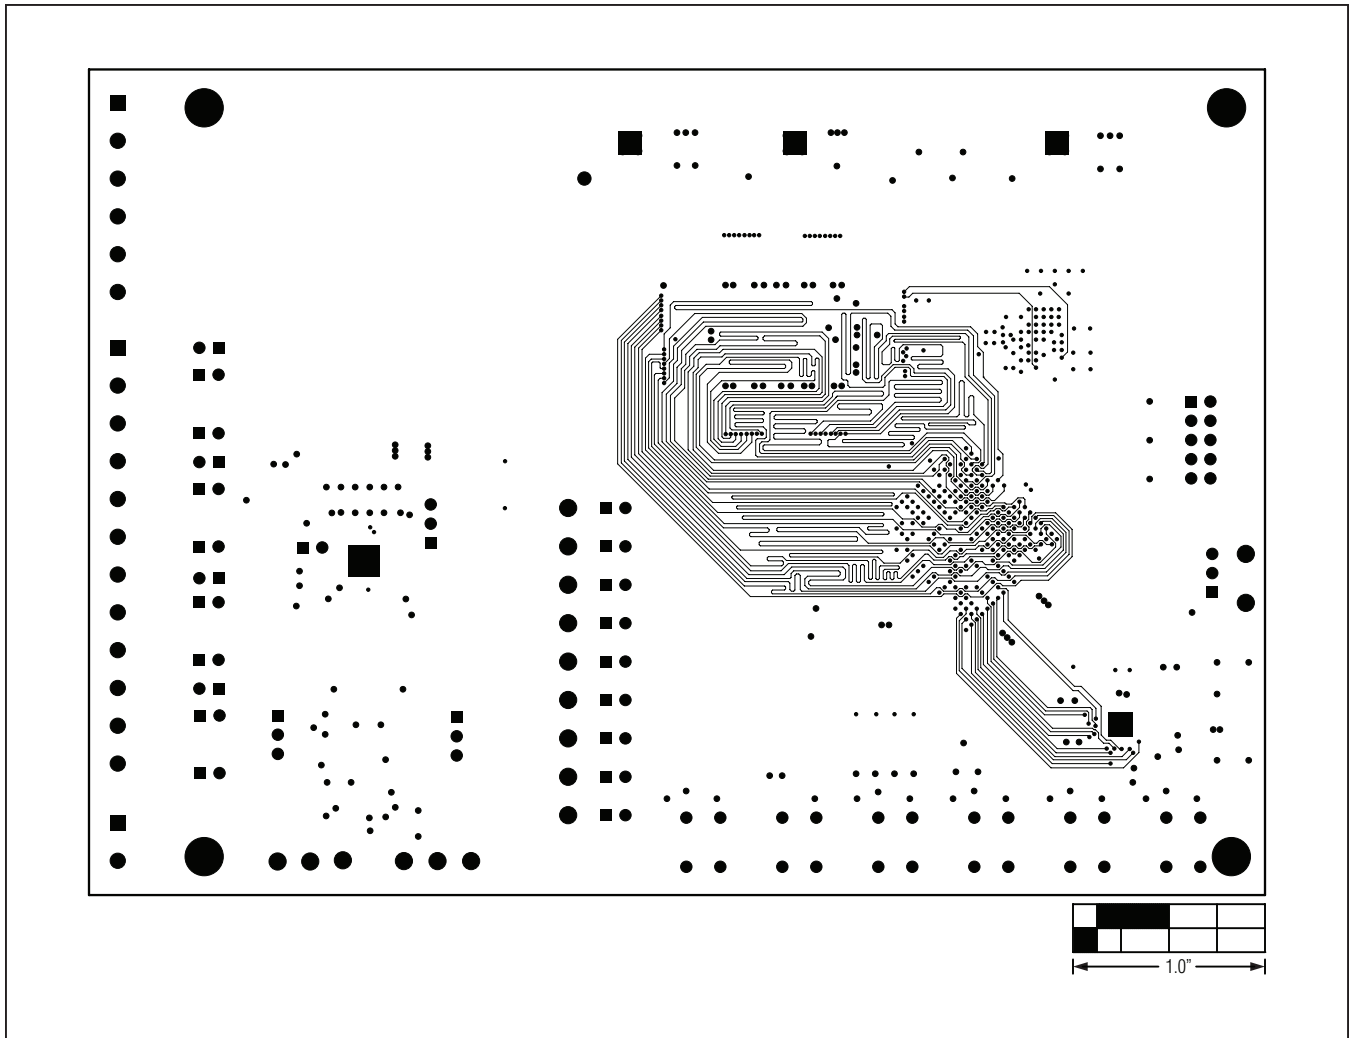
MAX11043 EV Kit PCB Layout—Power Layer 5
